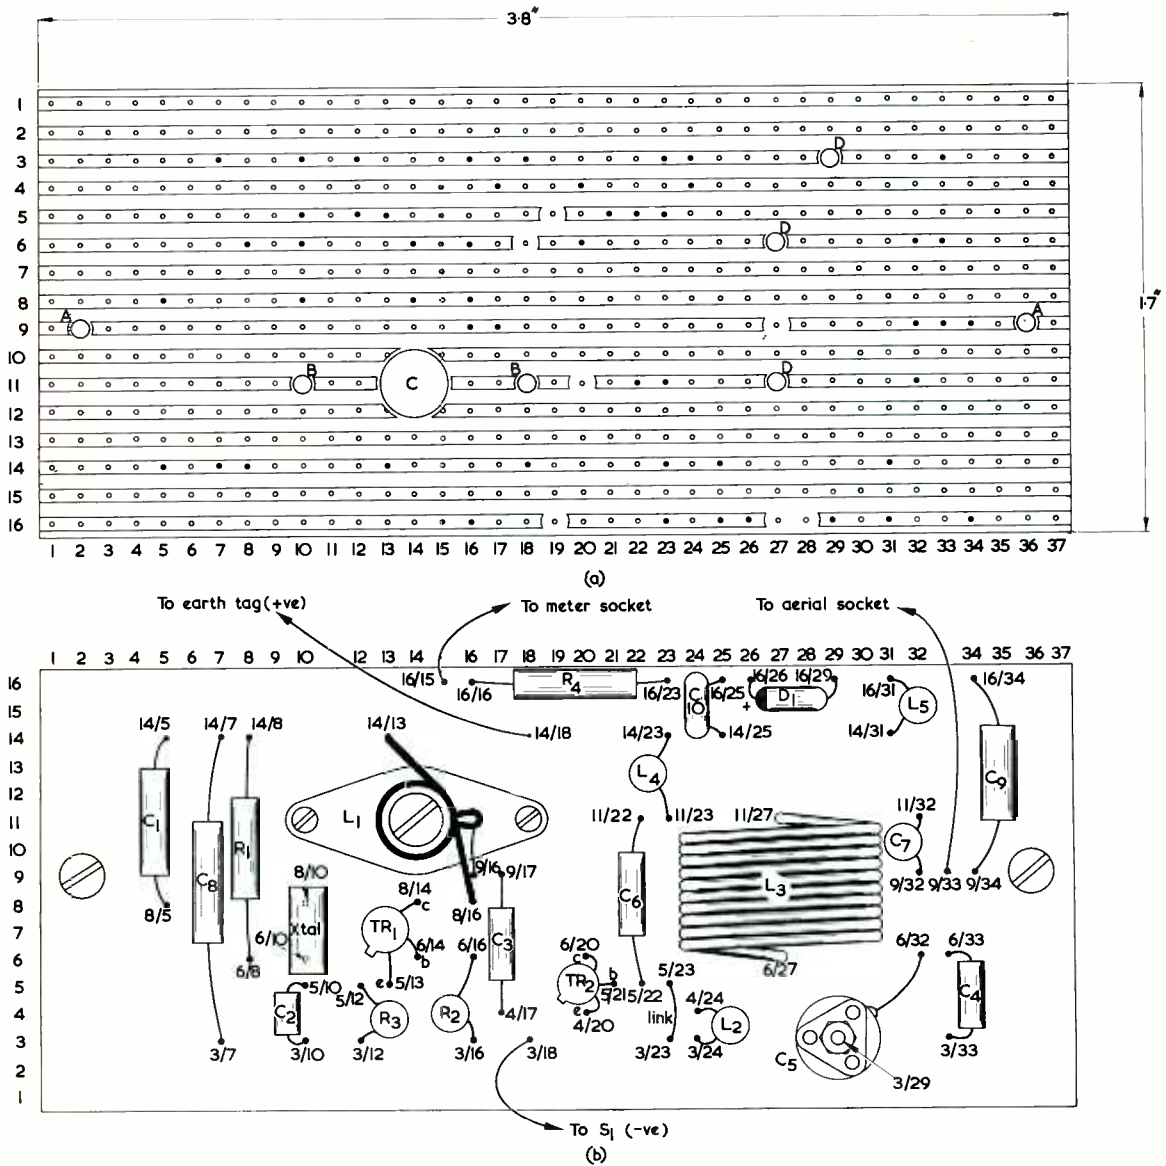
(a). The copper side of the Veroboard after the strips have been cut and the holes drilled
